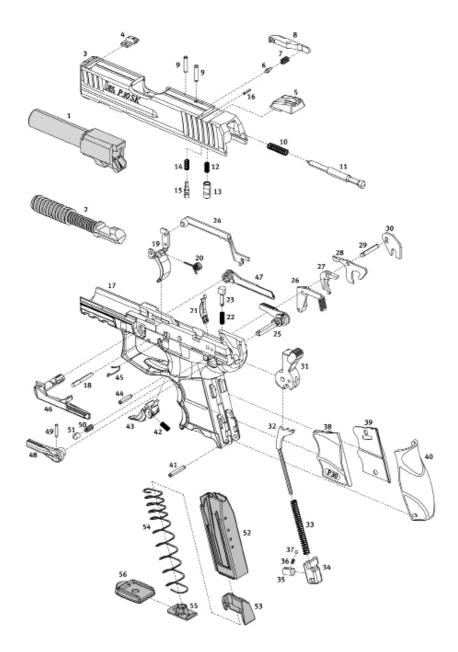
P30SKS V3 DA/SA Exploded Diagram
